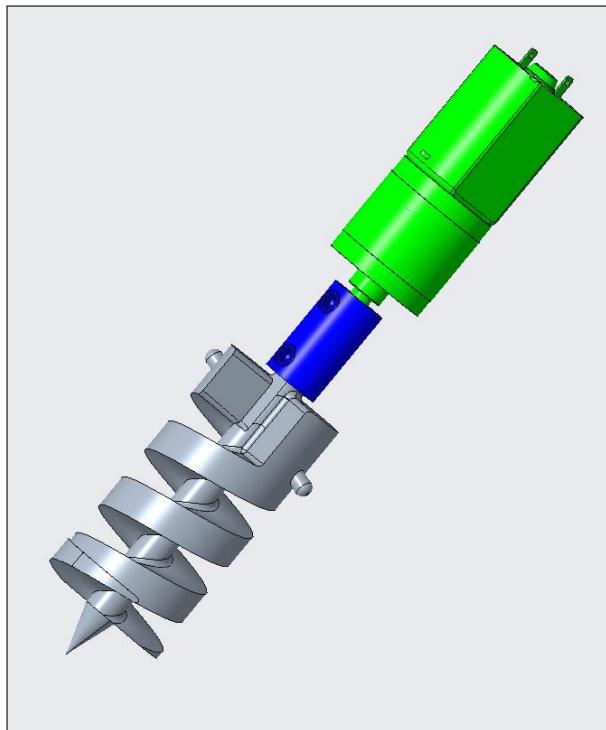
Soil Collection Assembly featuring the auger, auger bar, coupler, and motor
